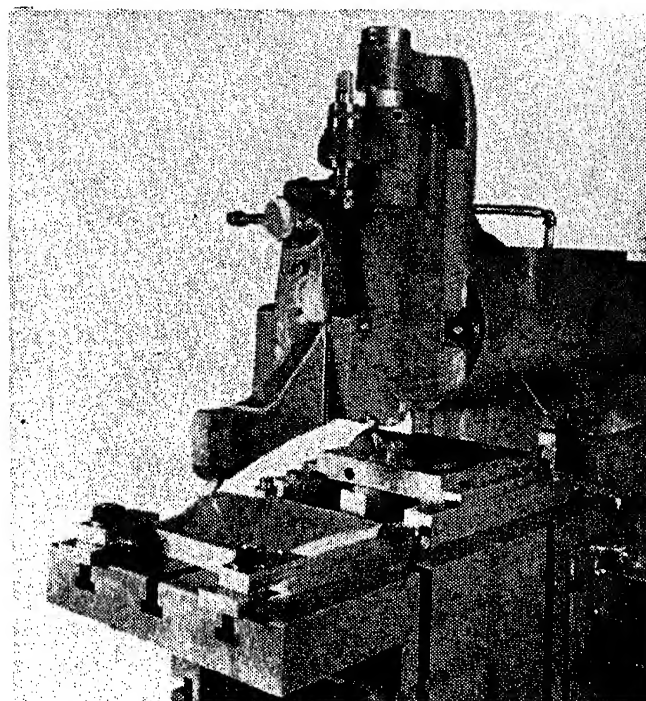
A profiling arrangement on a shaper. (Courtesy Rockford Machine Tool Co.)
